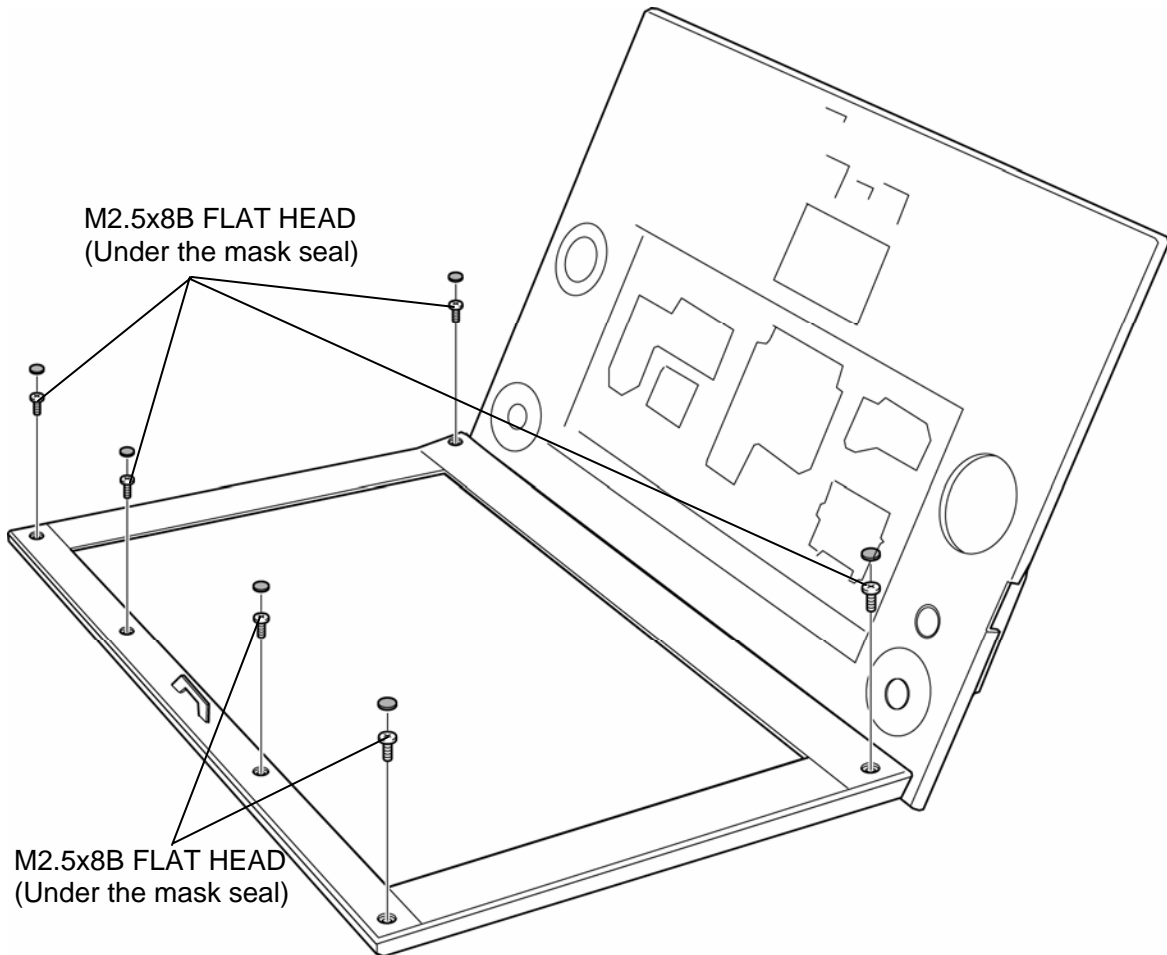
Removing the LCD assembly/Hinge assembly (2)
